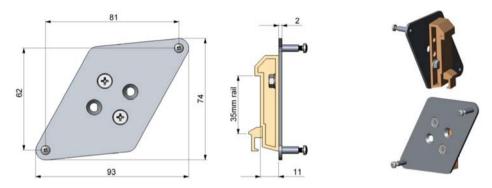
Rail mount adapter [TM-RAIL-CTL]
